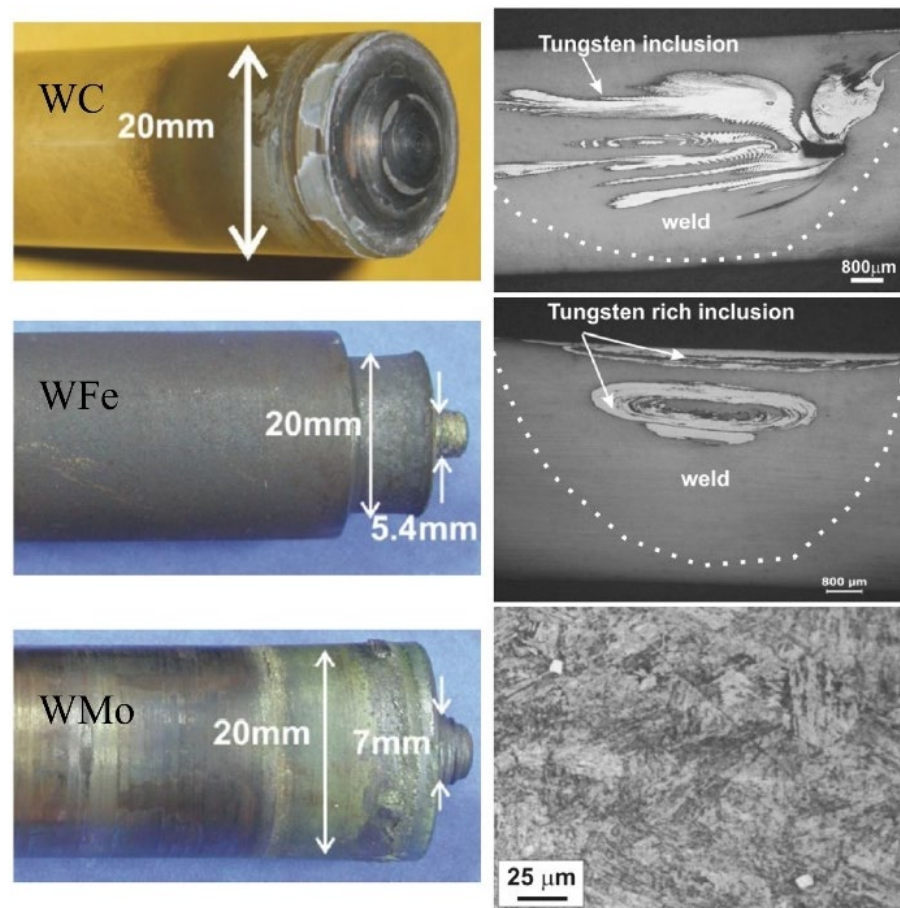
Butt FSW of 5.5 mm thick MDN-250. Different tools used for welding maraging steel ($\omega = 600$ rpm, $v = 25$ mm/min) [139].
